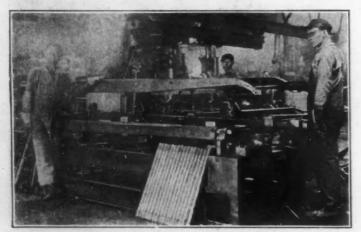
Assembled Frame Being Removed from Pneumatic Fixture
